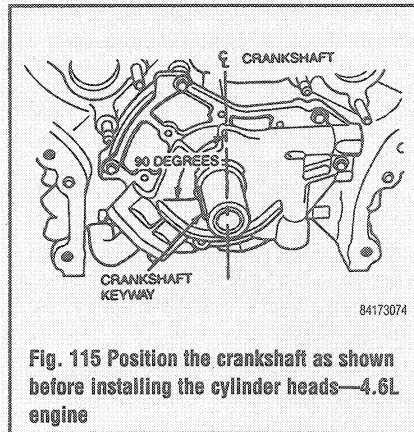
Position the crankshaft as shown before installing the cylinder heads—4.6L engine
